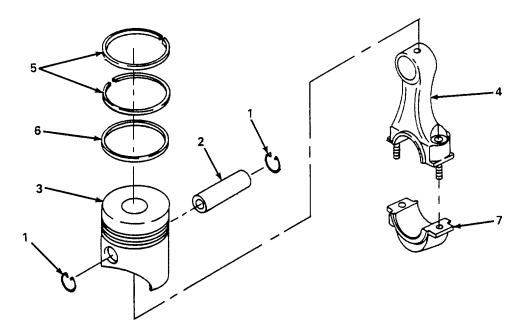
Piston and Connecting Rod Assemblies, Repair.
